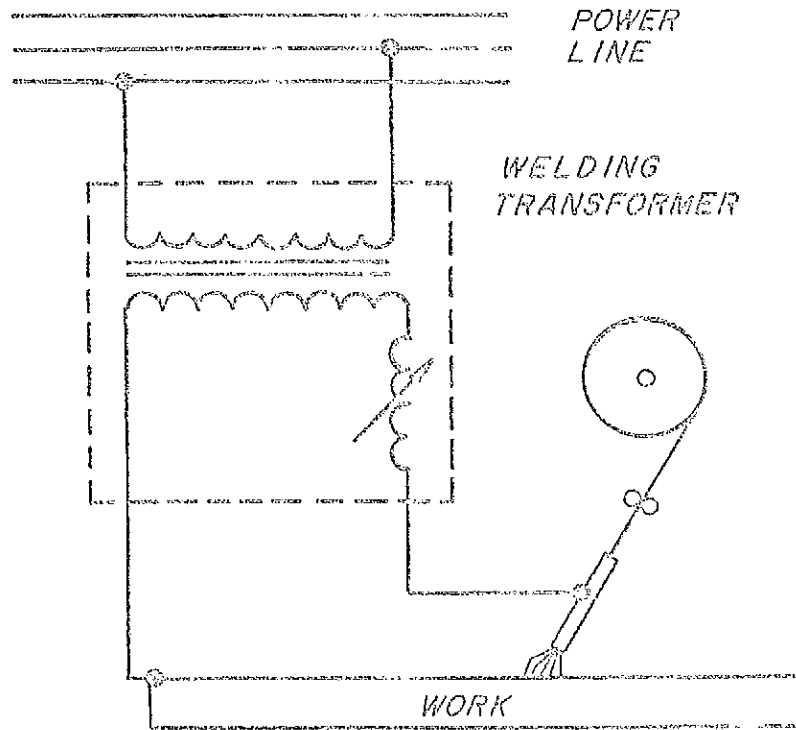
Alternating-current arc welding transformer supplying single submerged arc welding machine
